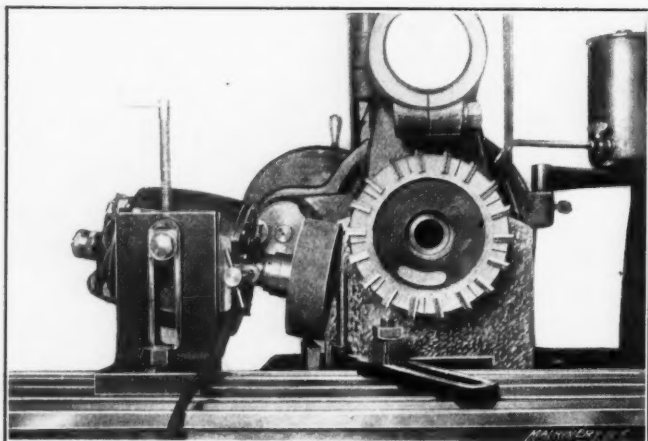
Sharpening the Periphery of a Face Mill, the Blades of which are set at a Slight Angle.
